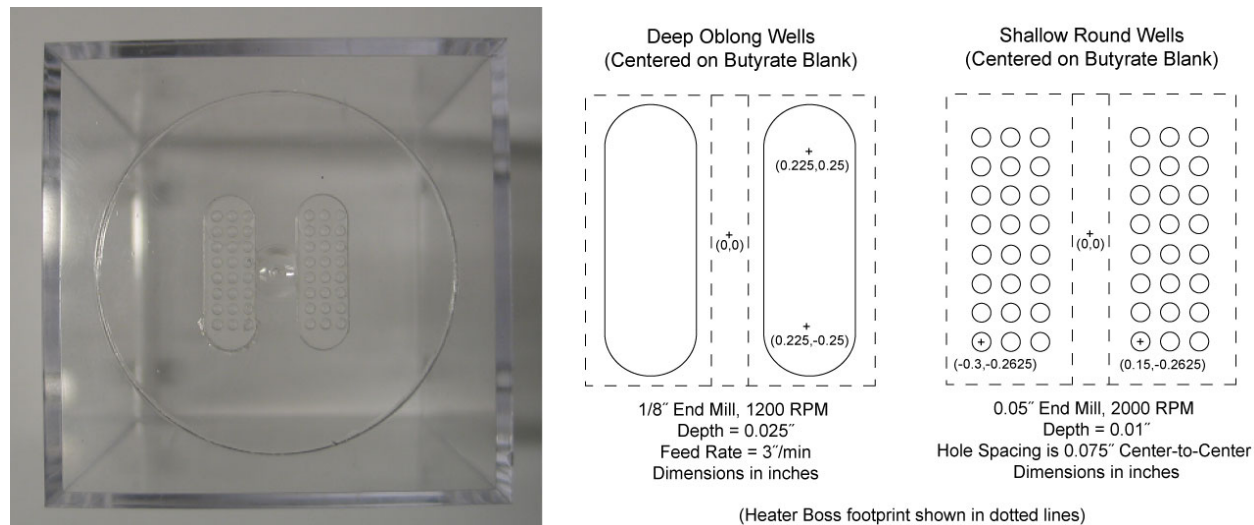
Photograph of machined butyrate housing prior to AIBN-polymer coating, as well as CNC milling dimensions and parameters.
